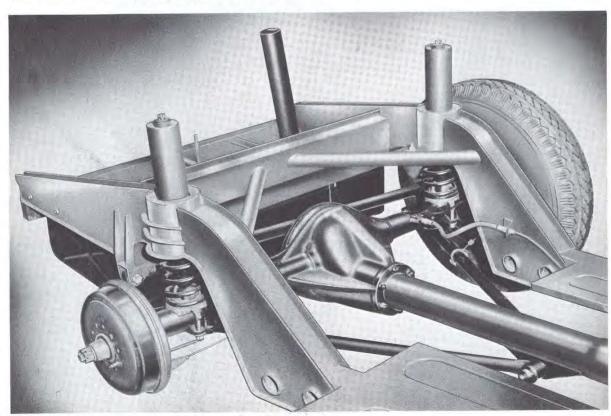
Rear Coil Spring and Shock Absorber Mounting.
